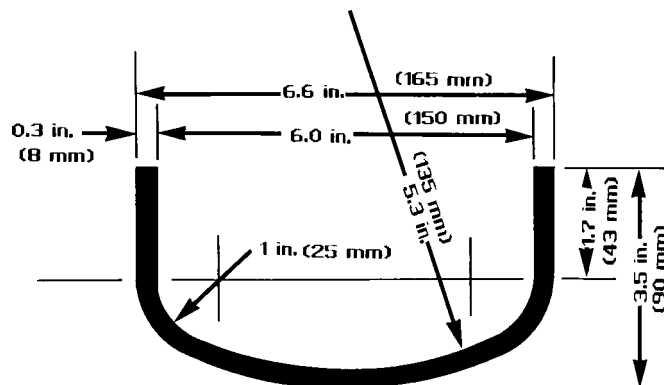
Standard 6 in. (150 mm) Weld Cap
